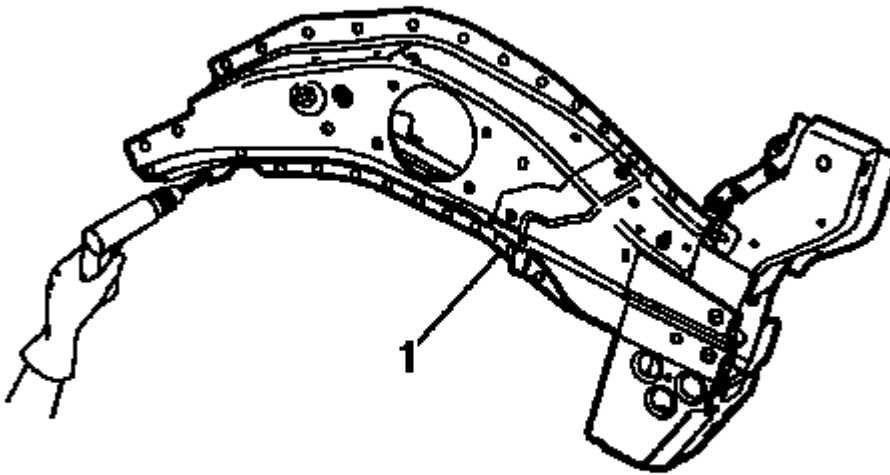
Drilling Holes In Replacement Front Compartment Front Half Rail
